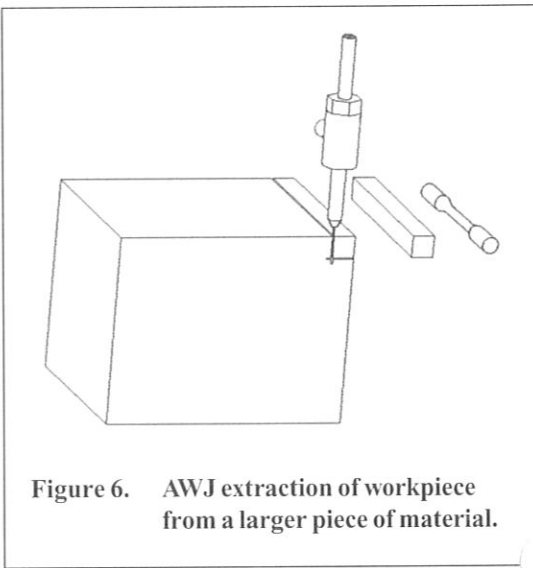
AWJ extraction of workpiece from a larger piece of material.
